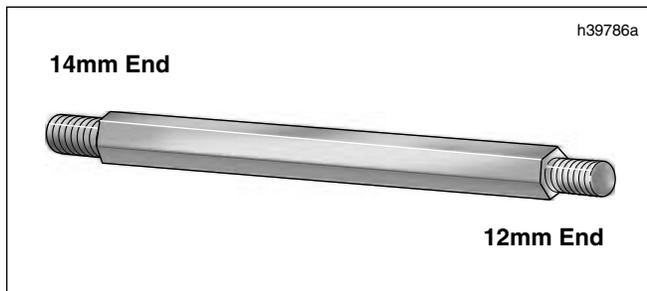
Cylinder Head Holding Fixture (Part No. HD-39786)
